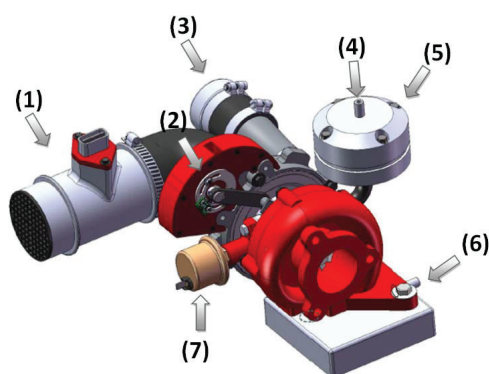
The model of the turbocharger rig. (1) MAF sensor, (2) stepper motor, (3) compressor outlet, (4) compressing air intake, (5) diaphragm pump, (6) compressor air turbine inlet, (7) Oil pressure sensor.
